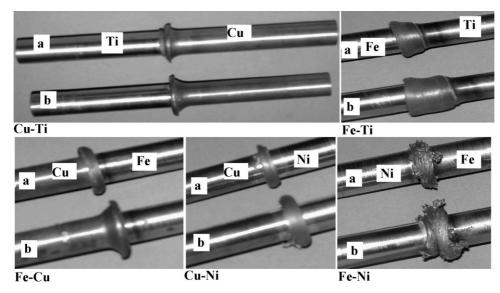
Dissimilar metal joints: (a) 3 mm burn off (b) 5 mm burn off.
